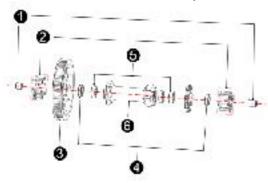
11.2 Dismount side cover of DC motor (see Fig 32)
